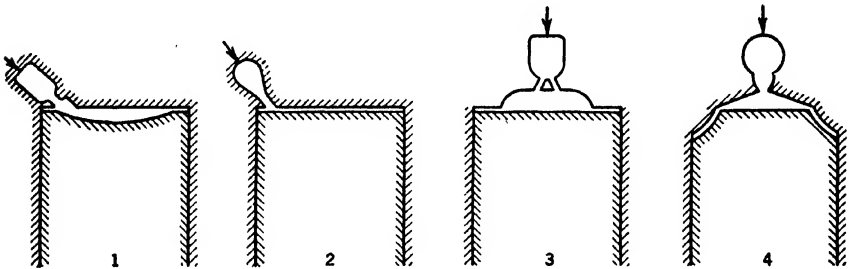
Precombustion types of cylinder head arrangement for solid-injection Diesel engines.
